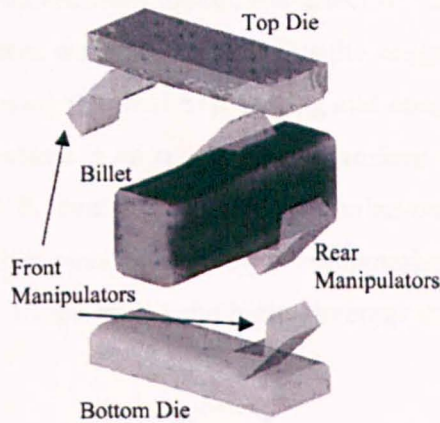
DEFORM -3D model of Davy open die forging³⁾.
